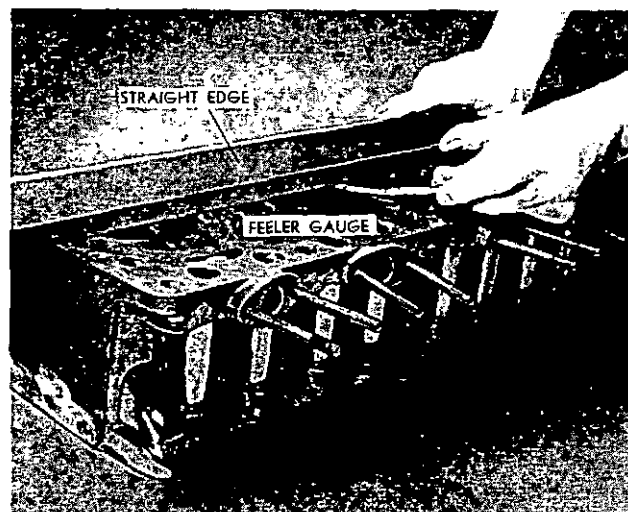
Checking Cylinder Head Flatness (.004 maximum) Lengthwise
